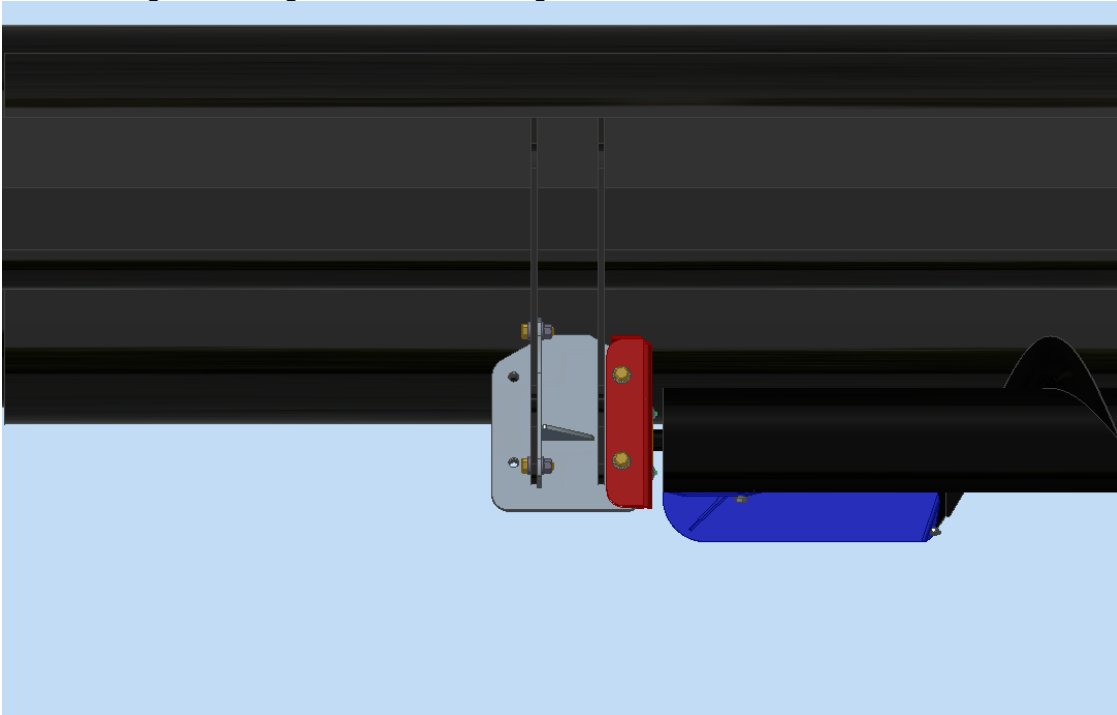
LH AUGER CENTER MOUNT TOP VIEW
